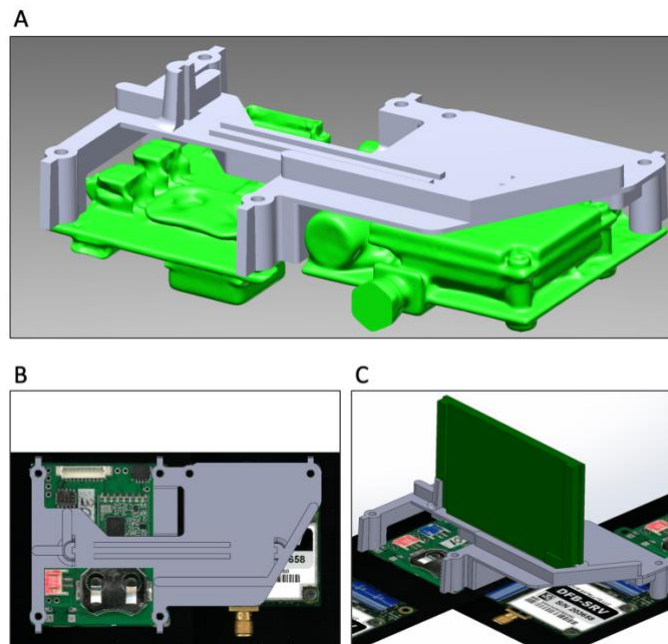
(A) CAD view of the payload skeleton with 3D scans of existing electronics fitted. Coupled with 2D scans and board dimensions, clearances for connectors and routed cables were checked prior to manufacture. (B) Top view of electronics skeleton showing alignment with to-scale 2D scans of circuit boards. (C) 3D view of skeleton with sensor board held in place.
